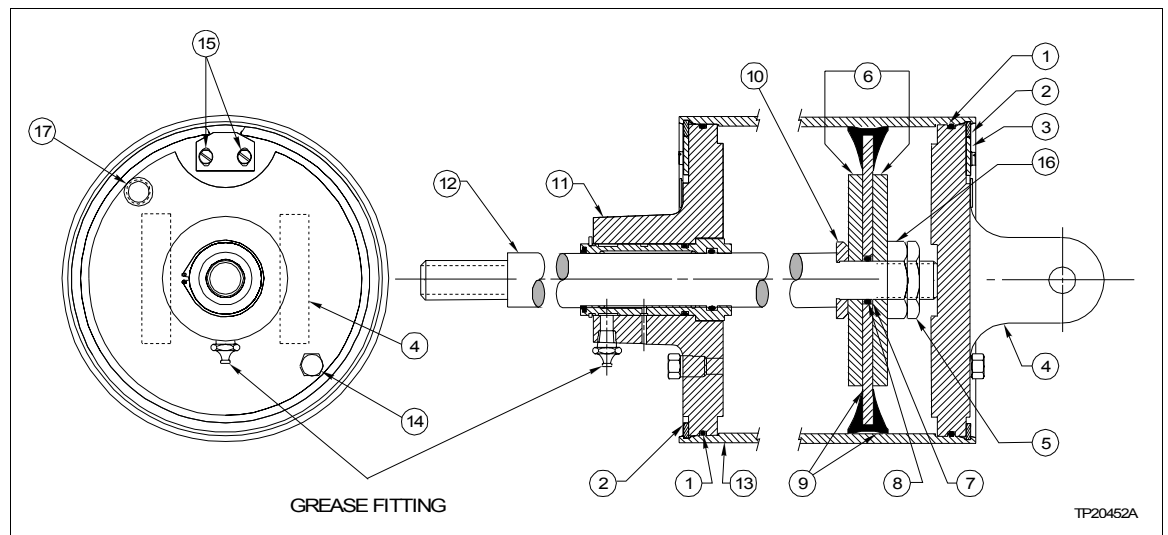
Cylinder Assembly for Type UP4 Actuators (Part Number 5328769°1)
